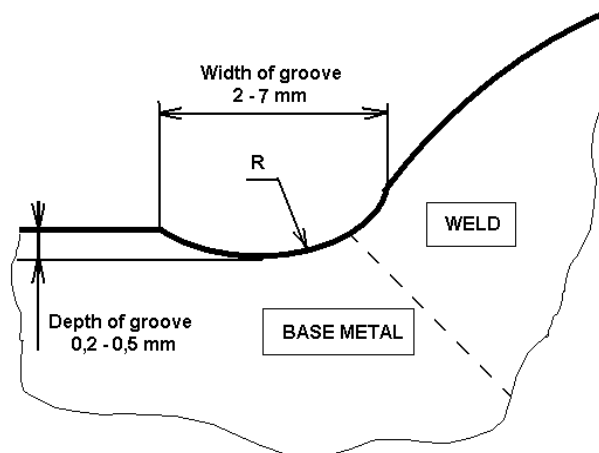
Profile of weld toe improved by Ultrasonic Peening
